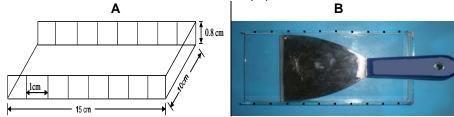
Geometrical dimensions of vegetarian diets shaping frame, (A): sketch view for frame dimensions (B): live picture view including the cutting knife and frame.
